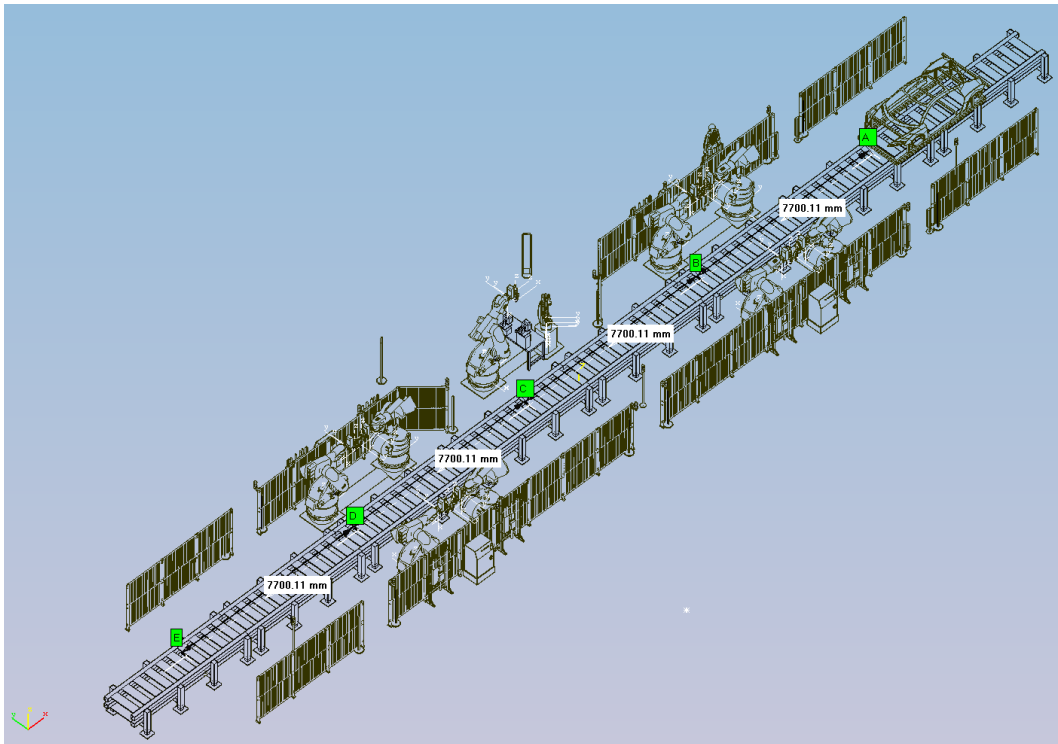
Sections of a Welding Line - Car flow
